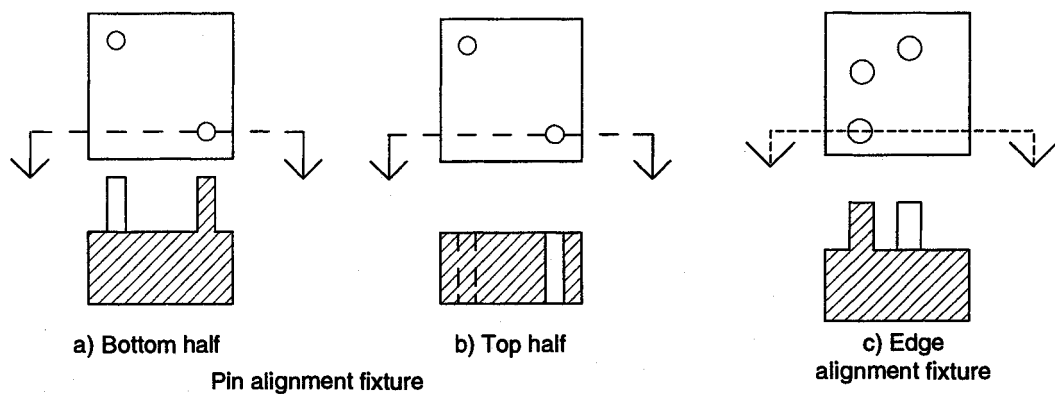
(a) Bottom half of pin alignment fixture (b) Top half of pin alignment fixture (c) Edge alignment fixture
